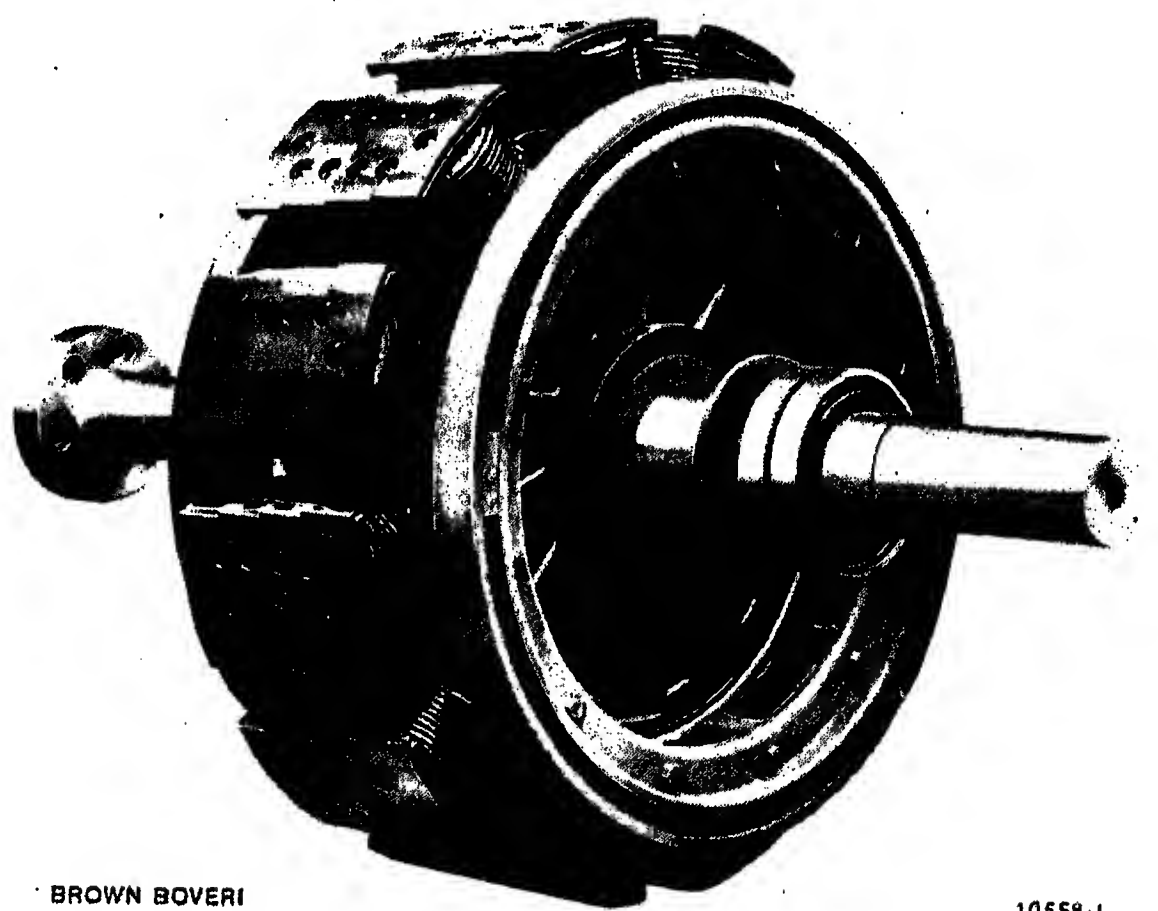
Rotor and flywheel for a three-phase alternator, 4750 kVA, 500 r. p. m.
